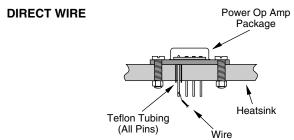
MOUNTING TECHNIQUES (CROSS SECTION VIEWS)
